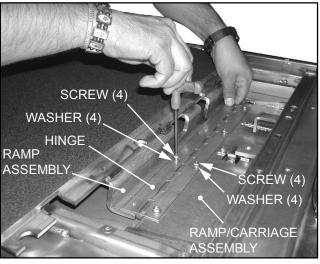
RAMP/CARRIAGE ASSEMBLY
